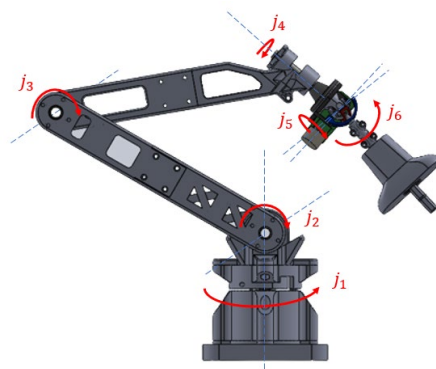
CAD rendering shows the six revolute joints of the 6-DOF passive robotic arm.
